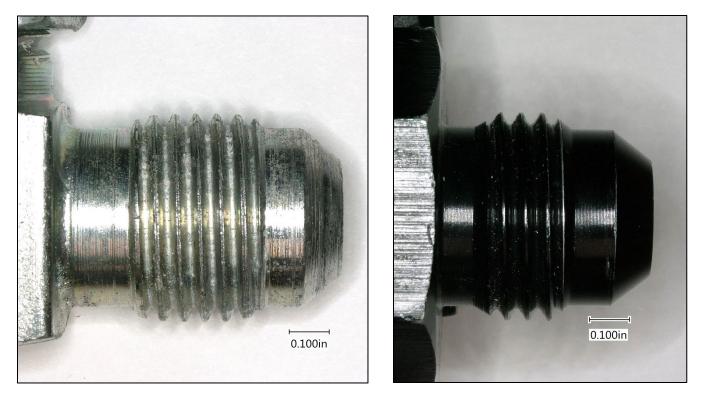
Threaded male end of the 90-degree outlet fitting (left) and the fuel pressure adapter fitting (right).
